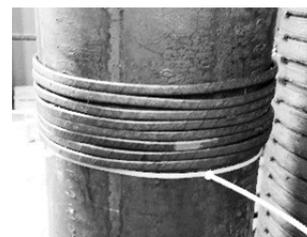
8-turns coil wound with rectangular cross-section wire mounted on the pressboard tube
